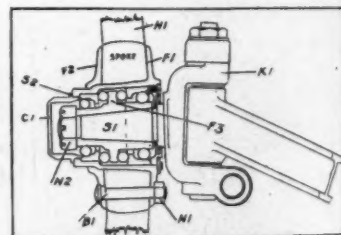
Sketch of the front wheel and knuckle, sectioned to depict ball bearings for radial and thrust loading.
